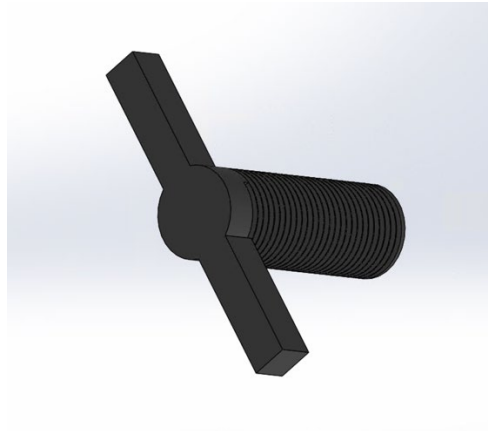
3D rendering of the screw that will be inserted into an attenuator holder.
